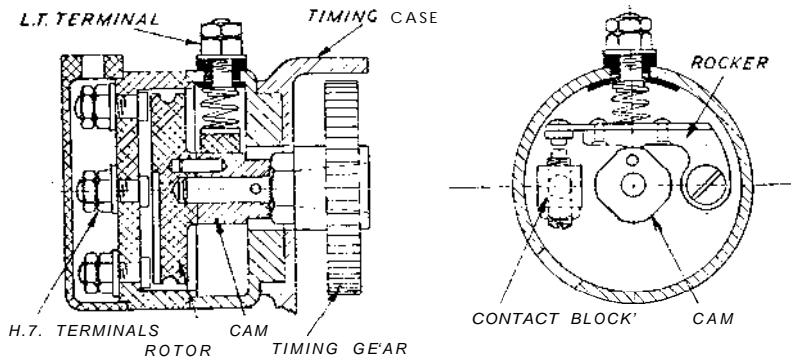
Section of distributor assembly, showing arrangement of unit on timing case, and face view of contact-breaker
